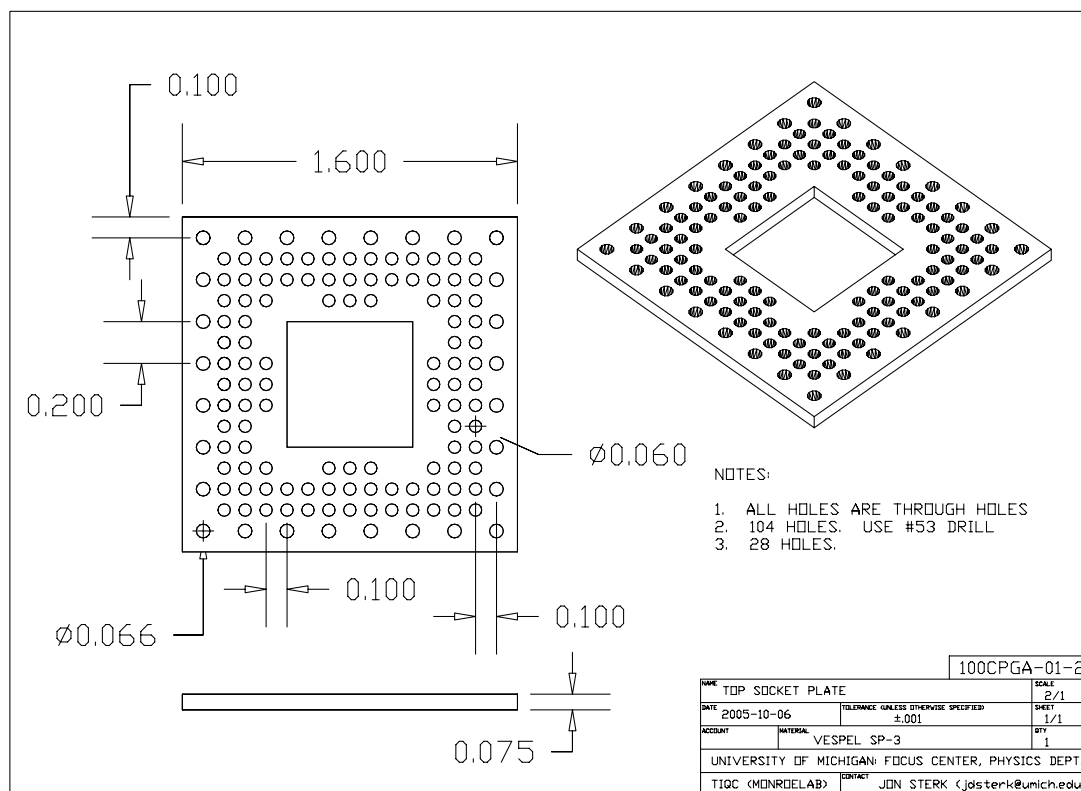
This figure (courtesy of Jon Sterk) shows the physical dimensions of the custom made socket used for connecting to the 100 pin CPGA chip carrier. It was fabricated out of Vespel SP3, which was chosen for its strength, flexibility, RF properties, and UHV compatibility. Two of these pieces would be used to sandwich 50 receptacles for contacting the CPGA pins (the other pins were not hooked up).
